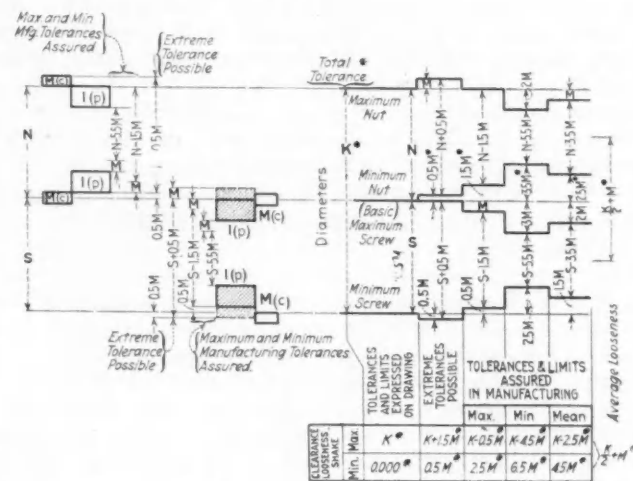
SIMPLE SCHEME OF THREAD GAGE TOLERANCES
